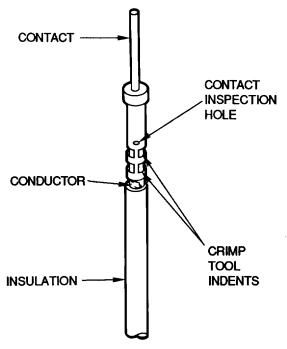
M22520/2-01 and M22520/7-01 Setup, Adjustment, and Operation (Sheet 4)
